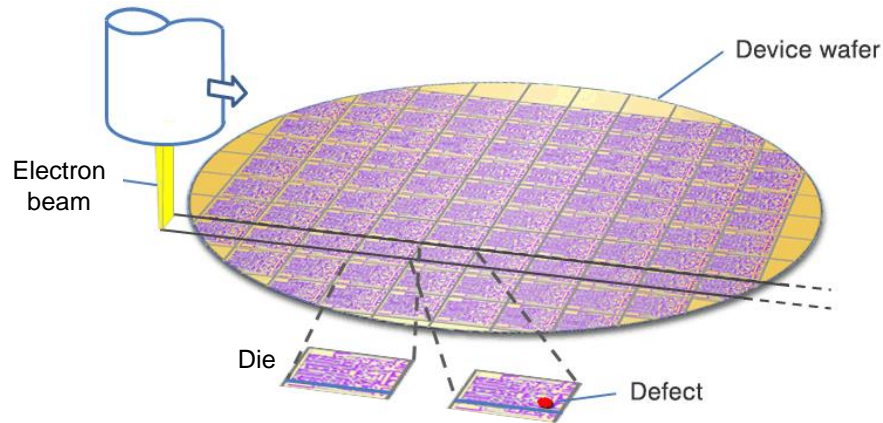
Principles of wafer defect inspection system [15]. Note that the process is carried out in high vacuum environment.
